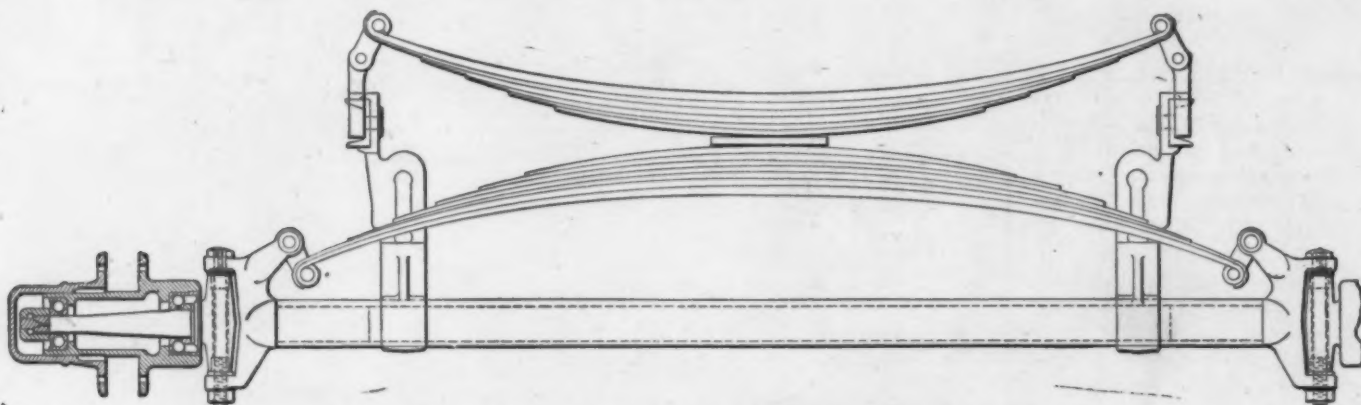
FRONT AXLE AND SPRINGS OF PACKARD CAR MODEL F.
